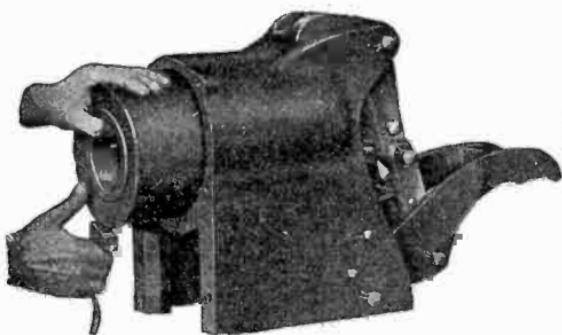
,168.—*How to assemble an air circuit breaker 17.* Inserting the operating coil in the solenoid magnet frame.
